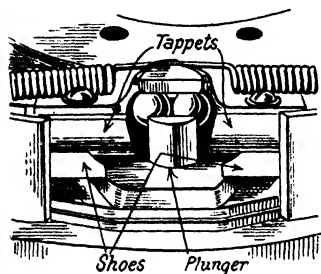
THE SHOE EXPANDING DEVICE OF A BENDIX-COWDREY BRAKE CONSISTS OF BALLS AND A PLUNGER OF HARDENED STEEL
